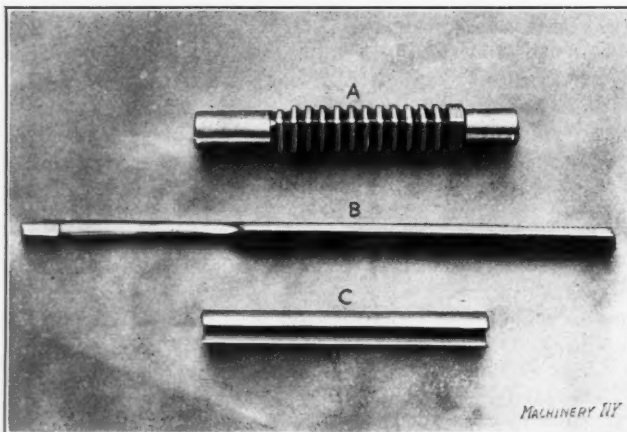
Broach, Cutter and Cutter Guide used in making Square Holes
